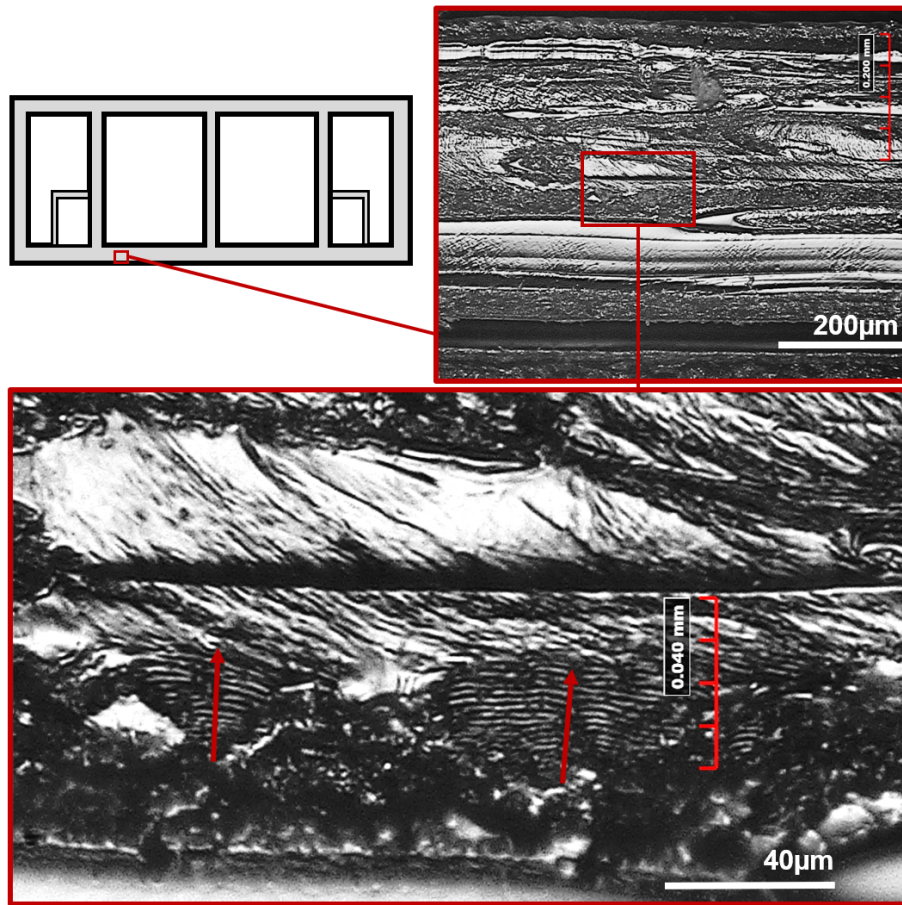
Fracture surface of fatigue B-PT sample. Images shows fatigue striations in the bottom section of the specimen.
